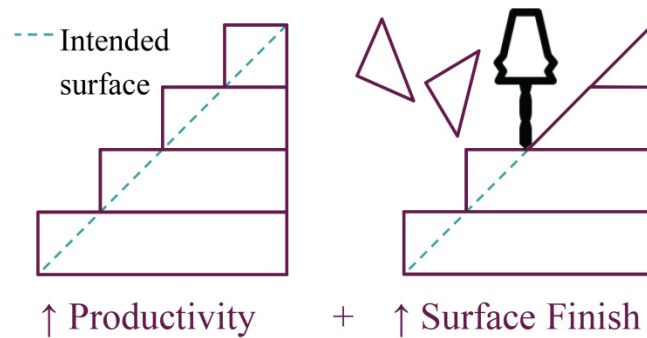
Cross-sectional view showing how an overbuilt part is machined using the combination of AM and machining (Lorenz et al., 2015).
